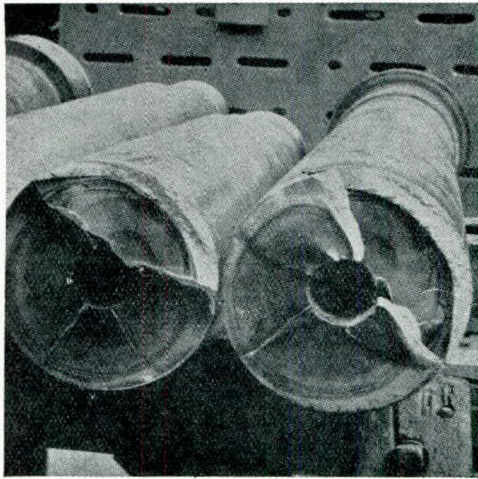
S.M. steel. Piston rod fractured surfaces.
